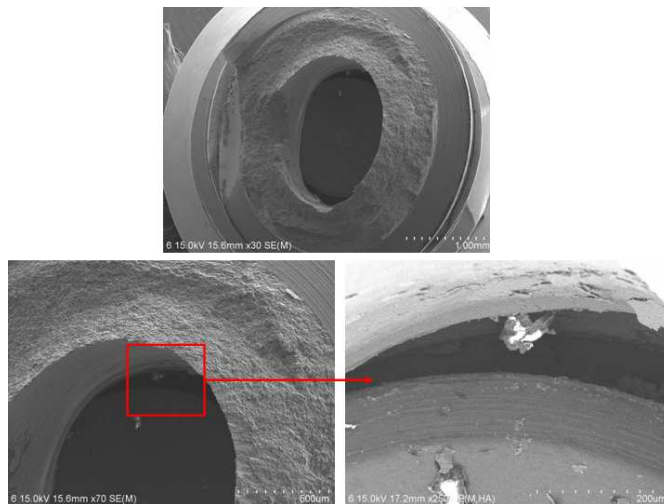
FE-SEM showing fractured TiN coated implant system surface after 20 times tightening/loosening and corrosion test.
